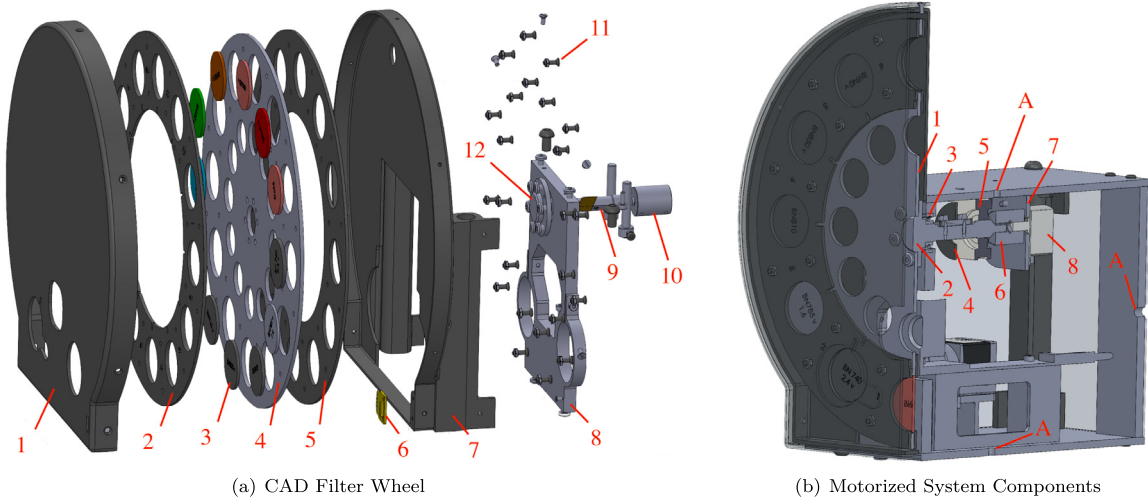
(a) CAD explosion view of filter wheel components. (1) Front protective cover, (2) Front support structure to hold filters in place, (3) Filters, (4) Aluminum filter wheel structure, (5) Rear support structure to hold filters in place, (6) Light sensor, (7) Back protective cover, (8) Structural support for cameras, cardan and bearing, (9) Cardan, (10) Connector between motor and cardan, (11) Screw to hold the three parts of the filter wheel together, (12) Final cardan structure to attach the wheel. (b) CAD of the filter wheel and motorized system components. (1) Filter wheel, (2) Cardan (3) Support with bearing, (4) Disk with notches for synchronization, (5) Support with bearing, (6) Connector, (7) Motor support for fixing, (8) Stepper Motor (28BYJ-48), (A) 3 out threaded for standard tripod screw.
